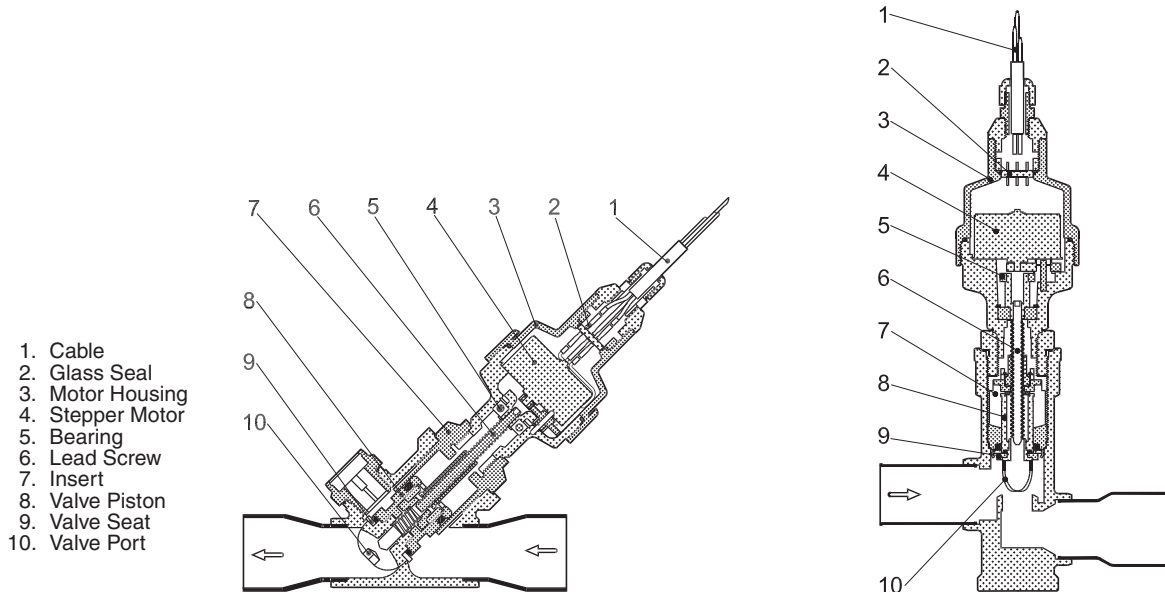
Cutaway Views of the Electronic Expansion Valve
